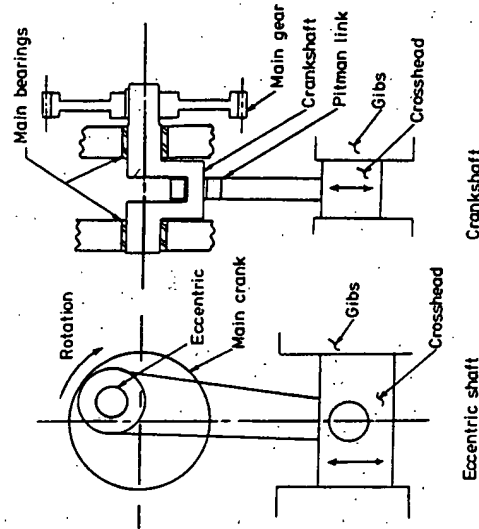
Eccentric or crank drive arrangement.¹⁸
